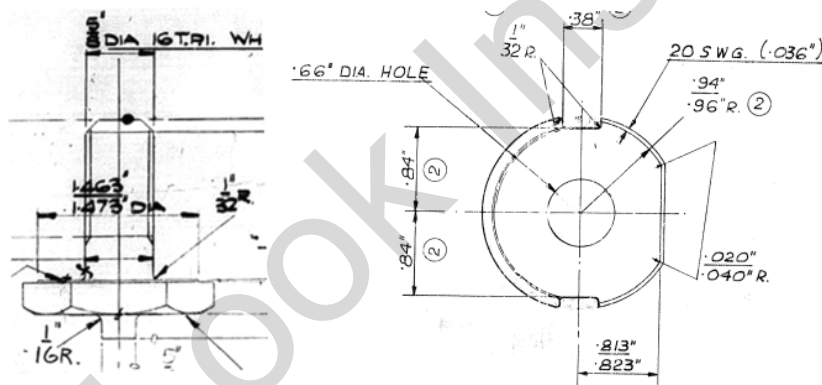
Flywheel bolt 22A747 and locktab 22A1155.
